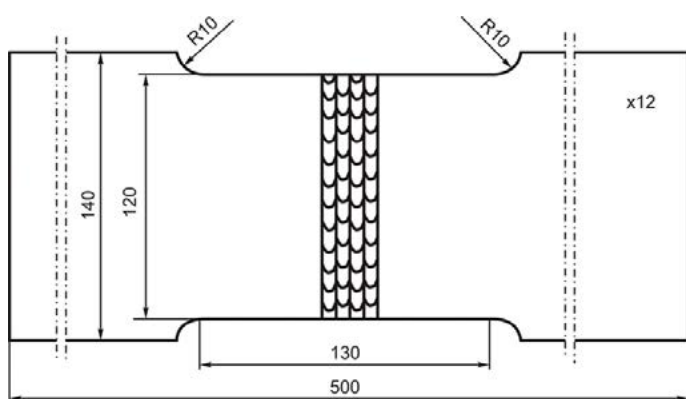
Shape and dimensions of the specimens used in the fatigue tests
